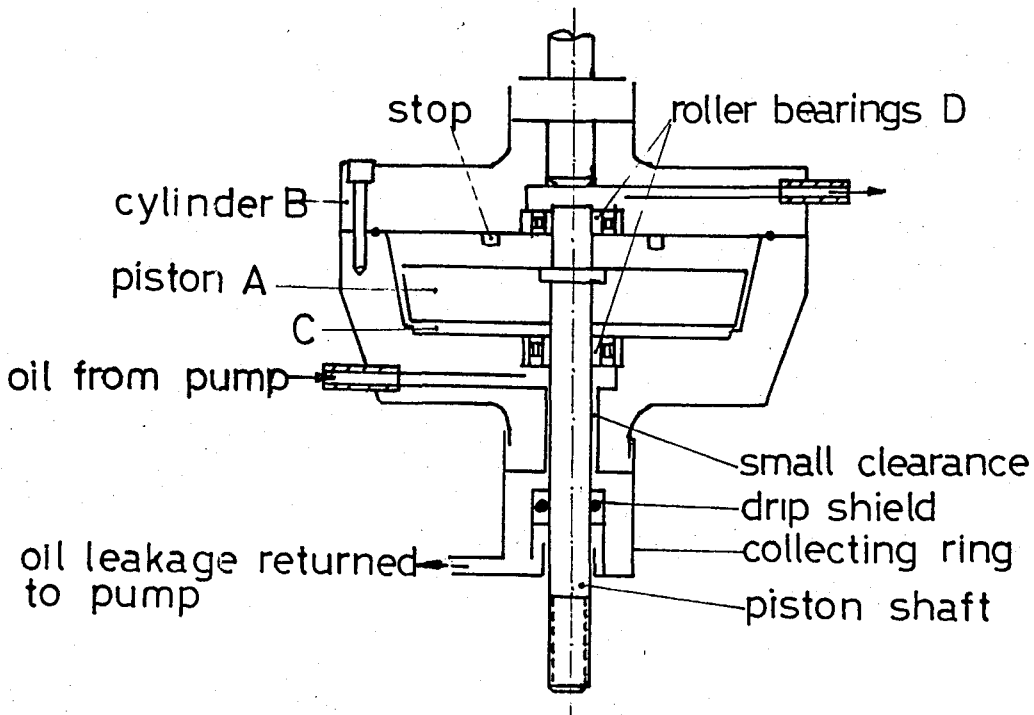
Cross-section of hydraulic thrust bearing. (7)
